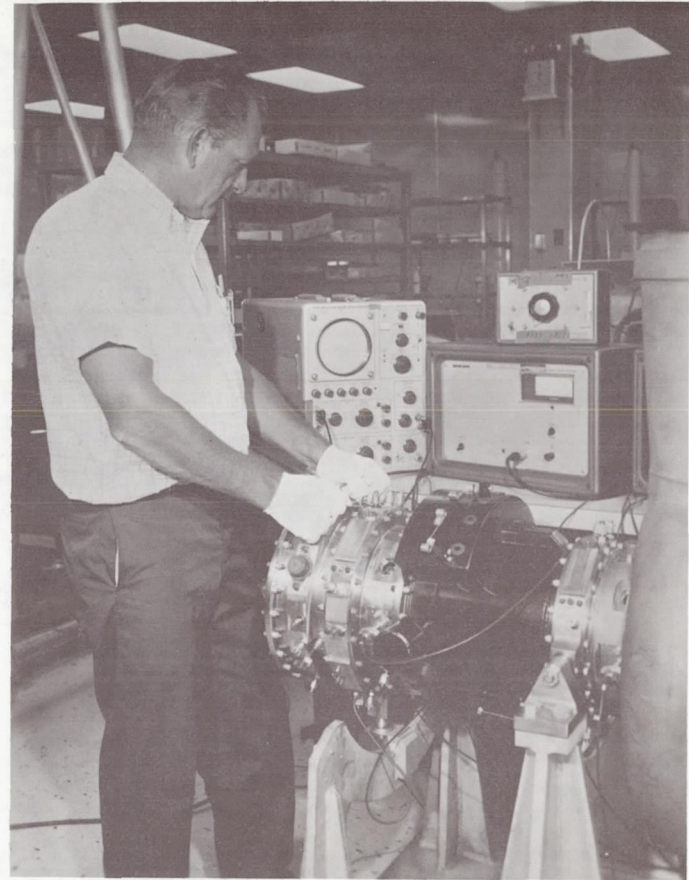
Adjustment of Rear Radial Shipping Fixtures
